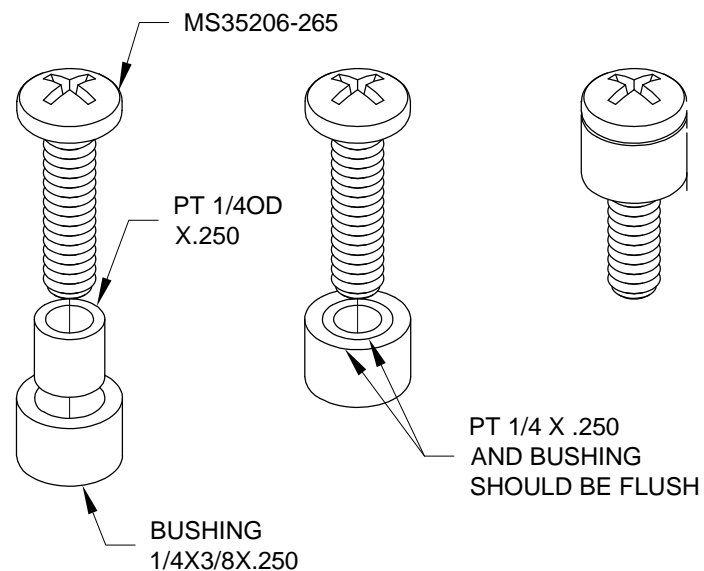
BUSHING AND SCREW ASSEMBLY
